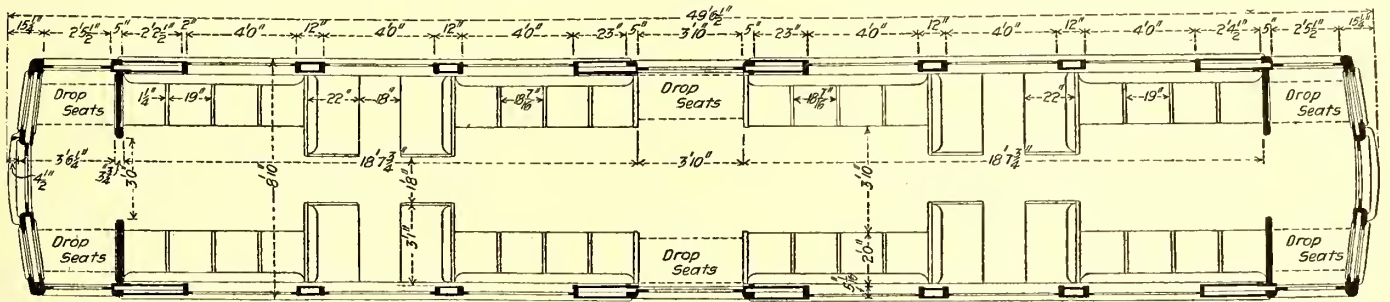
PLAN OF TRAIL CAR FOR THE LONDON UNDERGROUND DISTRICT RAILWAY
